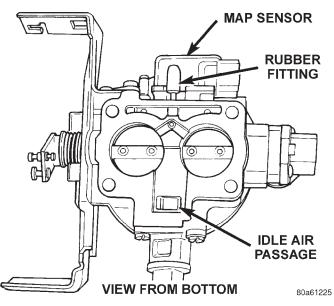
MAP Sensor L-Shaped Rubber Fitting—5.2L/ 5.9LEngines
